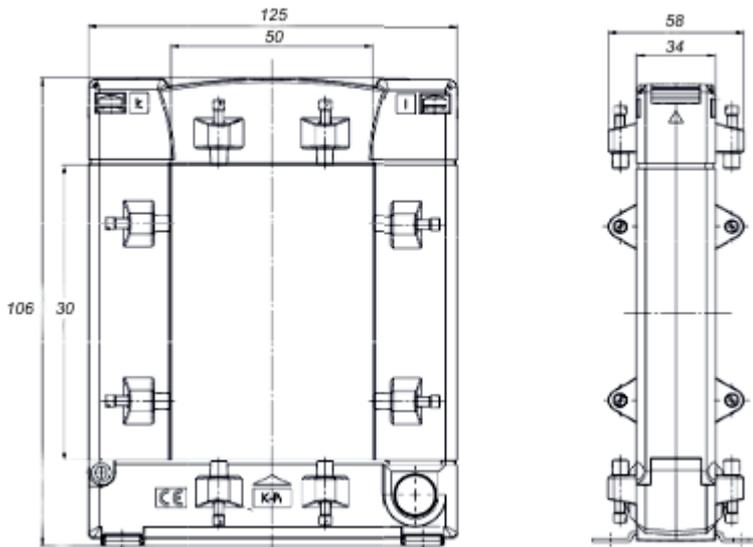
SCT4816-0018 dimensions, all dimensions in mm
